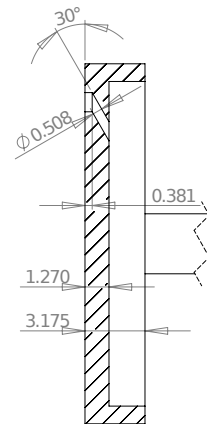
Drawing of one row of shaped hole test coupon; freestream flow from bottom to top; dimensions in mm
